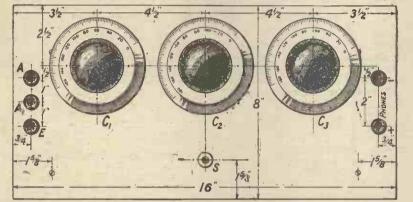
Dimensions for drilling the panel may be taken from this diagram. Blueprint No. C1070 A.
